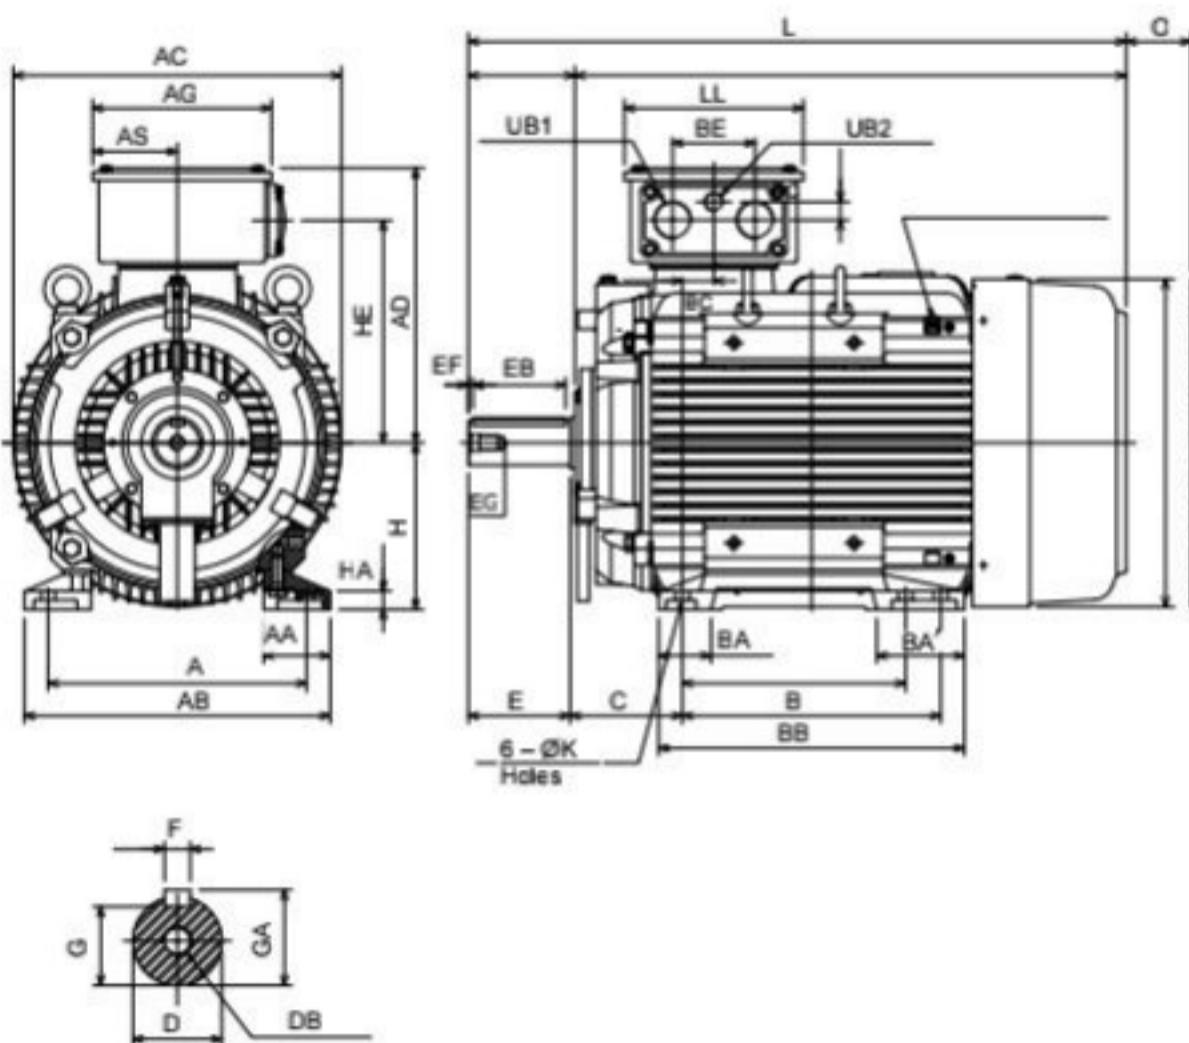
Outline drawing of cast iron design, feet version, mounting B3; frame size 160 – 180
